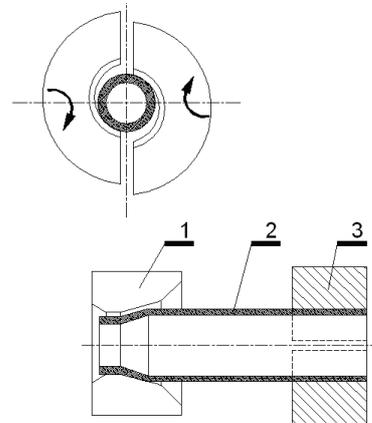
The diagram of rolling by the WPM method, where: 1 - rolling tool, 2 - reducing tube, 3 - handle of the rolling machine feeder
